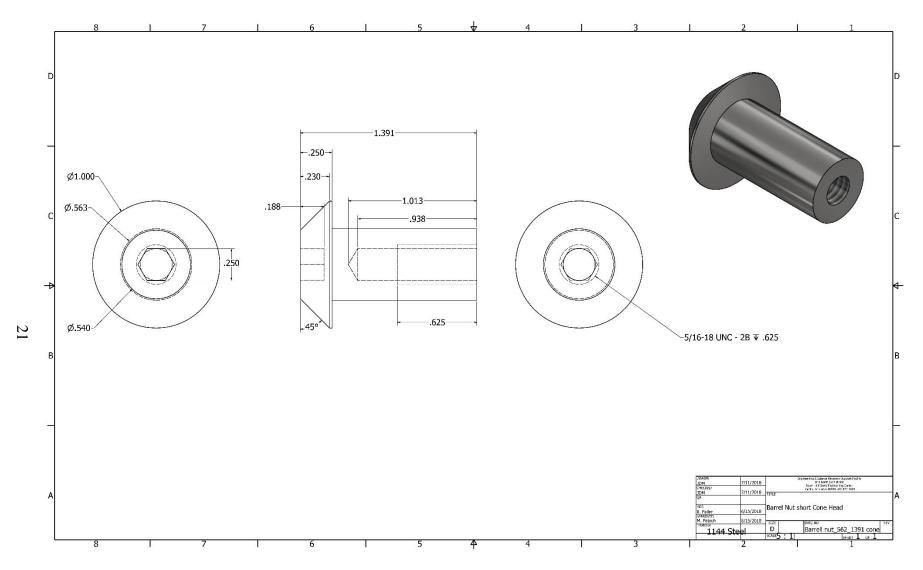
1.391-in. (35-mm) Long Barrel Nut with Cone Head Design
